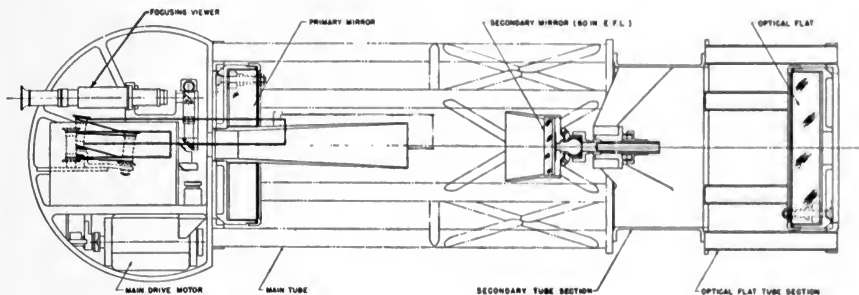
Side elevation of camera and main optical system (60-in. E.F.L.) with focusing attachment.
